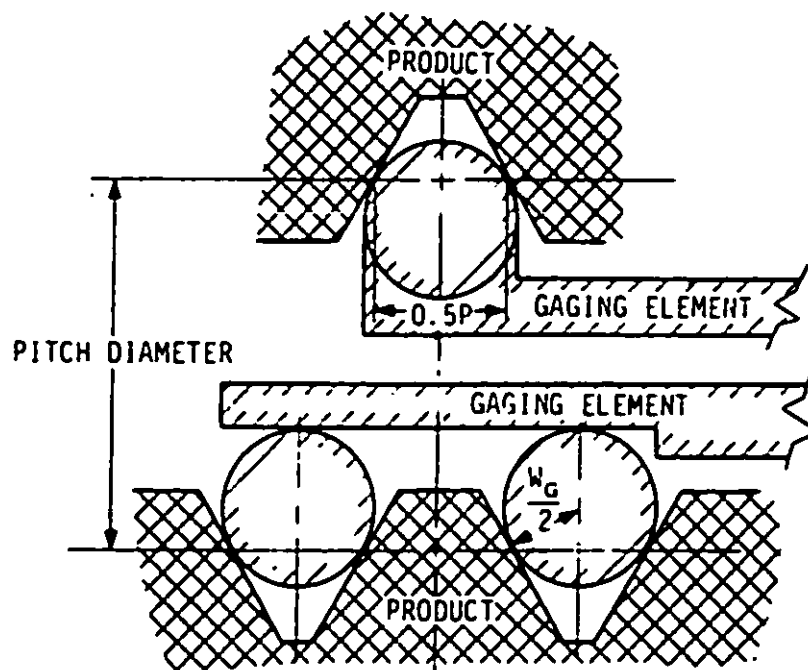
C.9 Gaging element for product internal pitch diameter measurement using "best size" balls.
